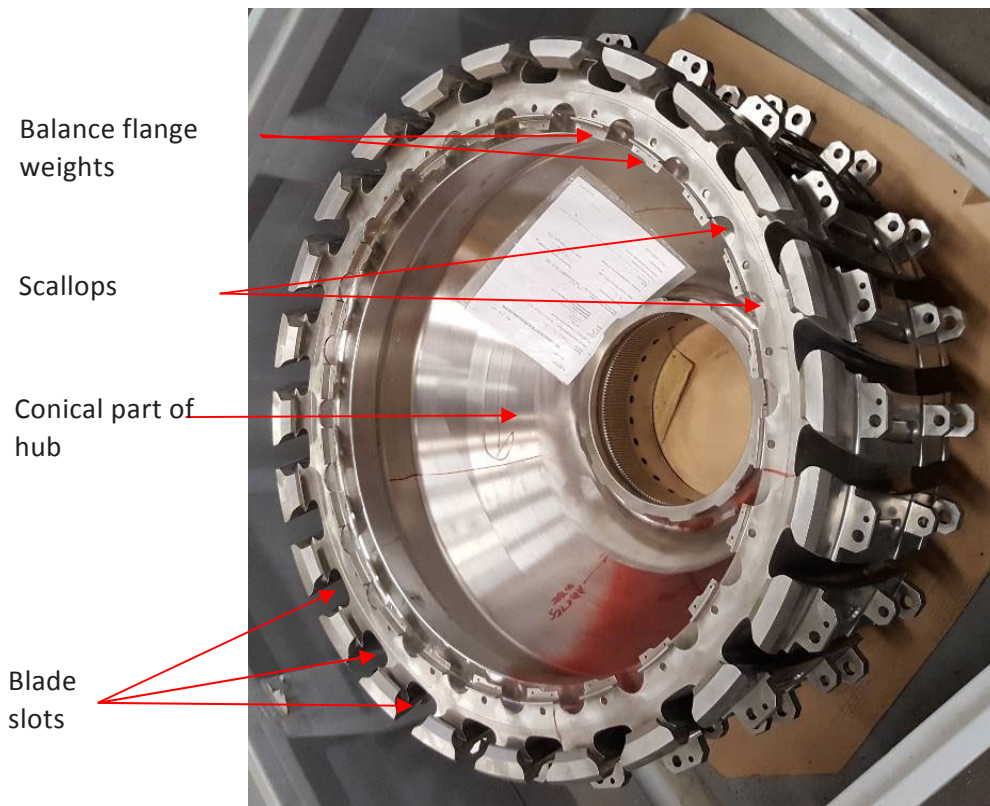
fan hub exemplar. The centre of the conical part is connected to the LP shaft. It is topped by a thicker cylindrical part with 24 machined blade slots.
